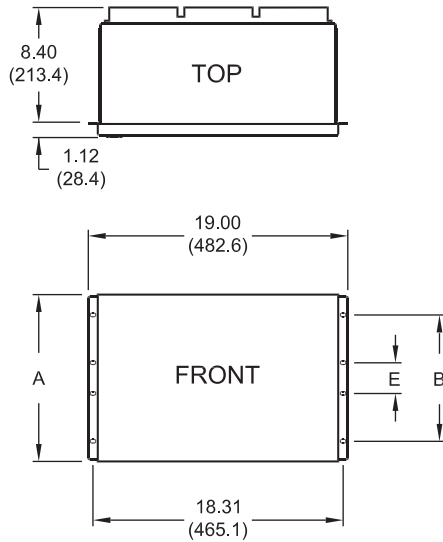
shows the SEL-487E relay in a rack-mount version that bolts easily into a standard 19-inch rack. From the front of the relay, insert eight rack screws (four on each side) through the holes on the relay mounting flanges. Reverse the relay mounting flanges to cause the relay to project 2.75 inches (69.9 mm) from the front of your mounting rack and provide additional space at the rear of the relay for applications where the relay might otherwise be too deep to fit.
